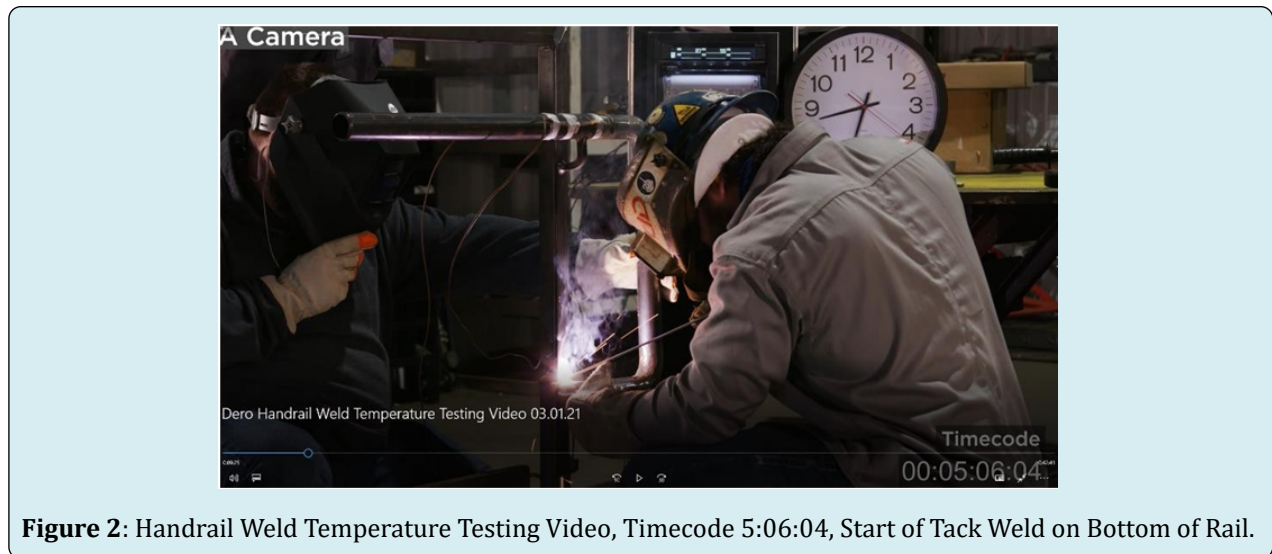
Handrail Weld Temperature Testing Video, Timecode 5:06:04, Start of Tack Weld on Bottom of Rail.
